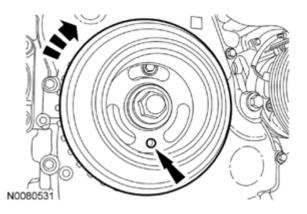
Positioning Crankshaft Pulley Hole At 6 O'Clock Position Courtesy of FORD MOTOR CO.
